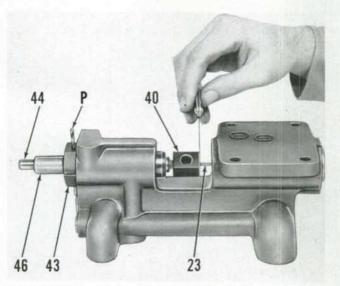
Checking adjustment of valve keeper. Insert a 1/8 inch (3 mm) diameter pin (P) or drill bit through valve spool (44) and bushing (43) to lock control valve in neutral position. Use a feeler gage to measure clearance between keeper and actuator rod (23).
